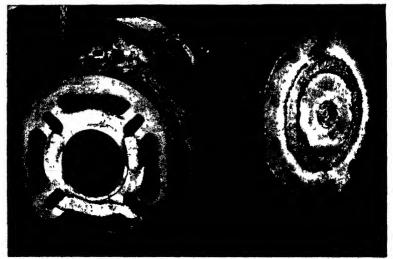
Cracked cylinder water jackets can be repaired by brazing.
